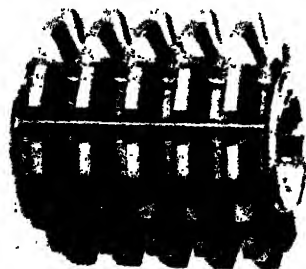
Spur or helical gears are accurately cut by the use of the hob, a worm-shaped tool. (*The Barber-Colman Company*)
